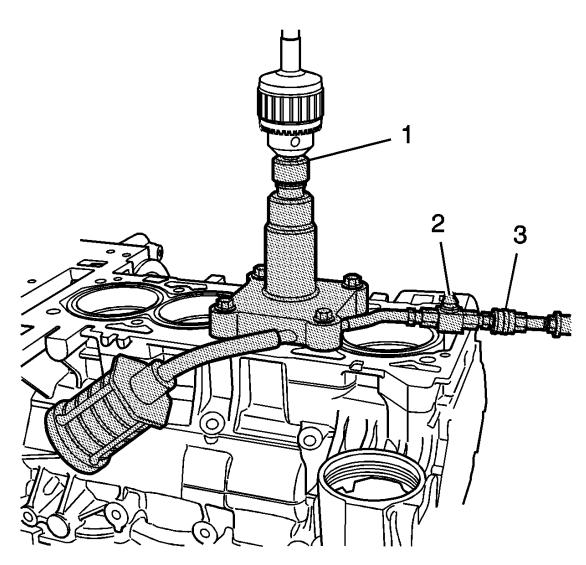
Aligning Trim Tool Assembly Courtesy of GENERAL MOTORS CORP.
